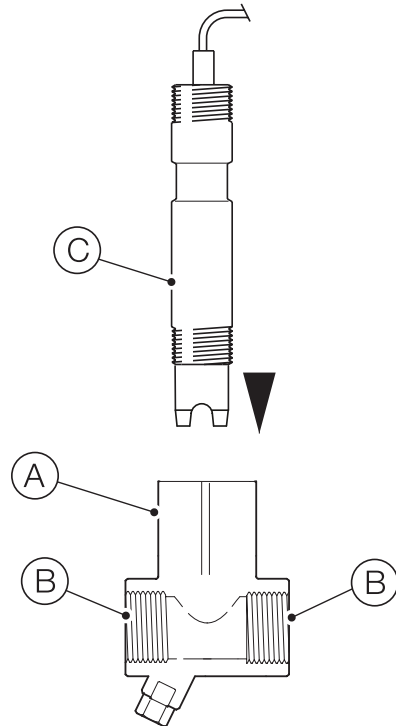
Screw-in T-piece assembly installation – BSP/NPT
